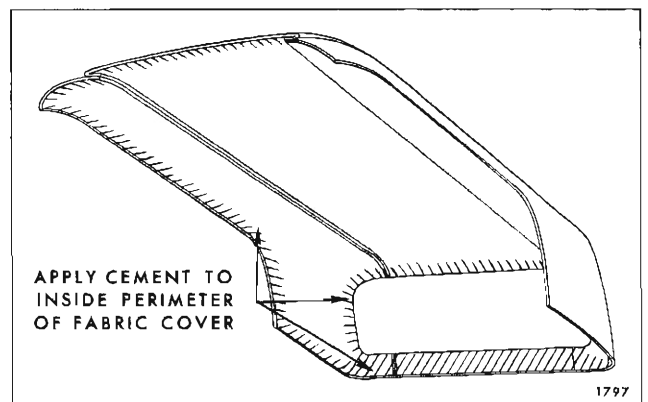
J2—Cementing of Fabric Roof Cover for Styles with Felt Pad
